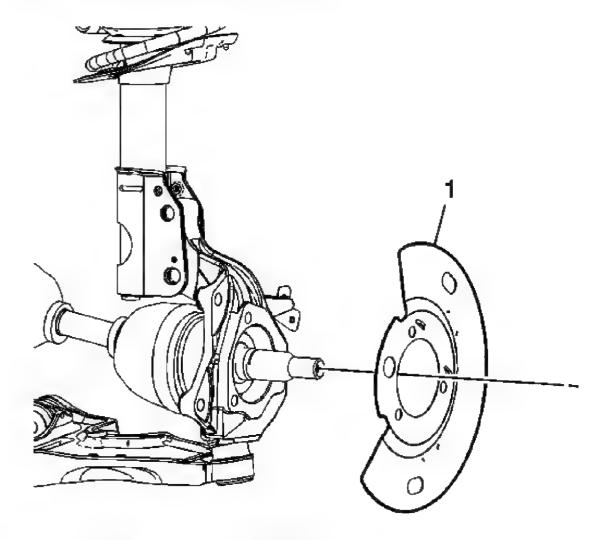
Replacing Front Brake Shield Courtesy of GENERAL MOTORS CORP.
